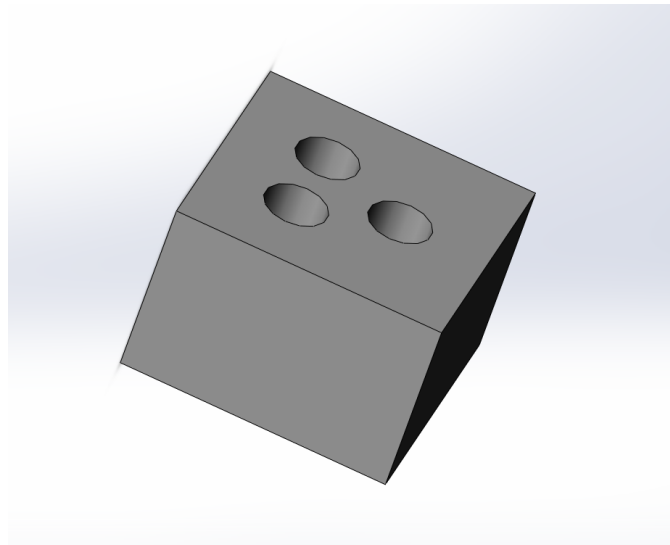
Top view of 3-D printed cap. The cap was designed in SolidWorks and fits tightly over the SiPMs, allowing three fibers to feed into a single SiPM.
